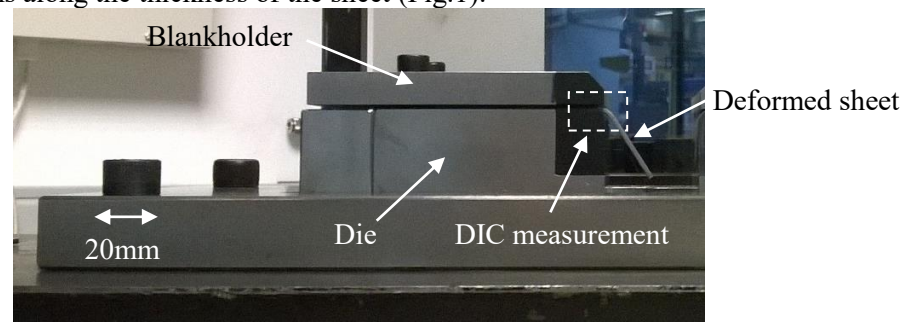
Photo of the bending rig mounted on an Instron 5800 frame
